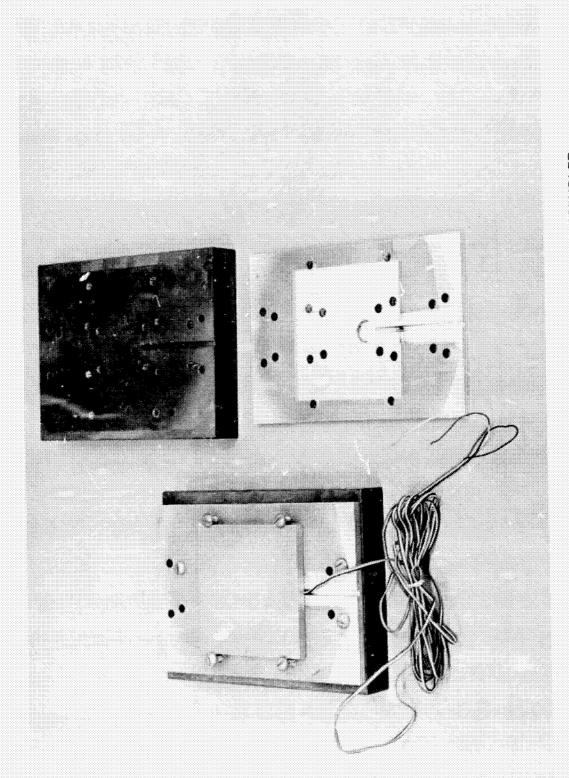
PEENING SPECIMEN HOLDER WITH SPECIMEN AND DISASSEMBLED
